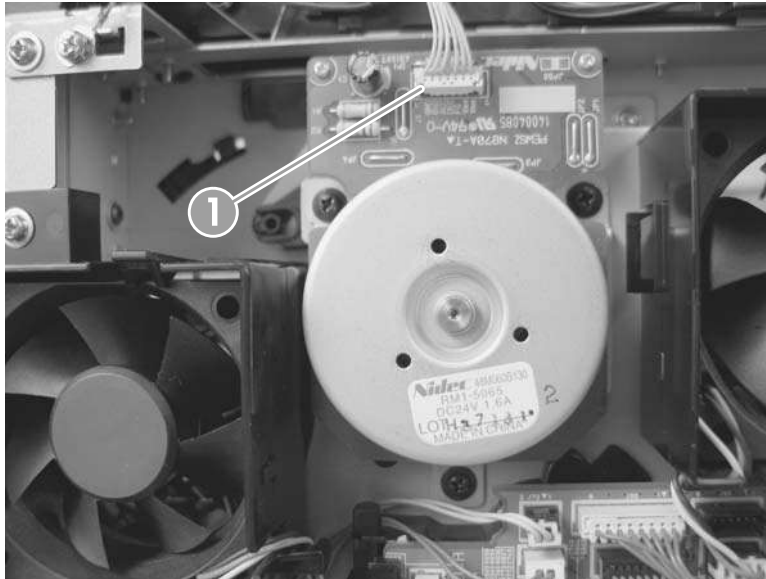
Remove the pickup-motor assembly (2 of 2)
